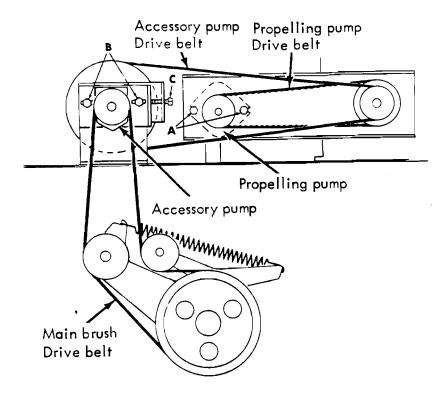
BELT PLACEMENT & ADJUSTMENT
